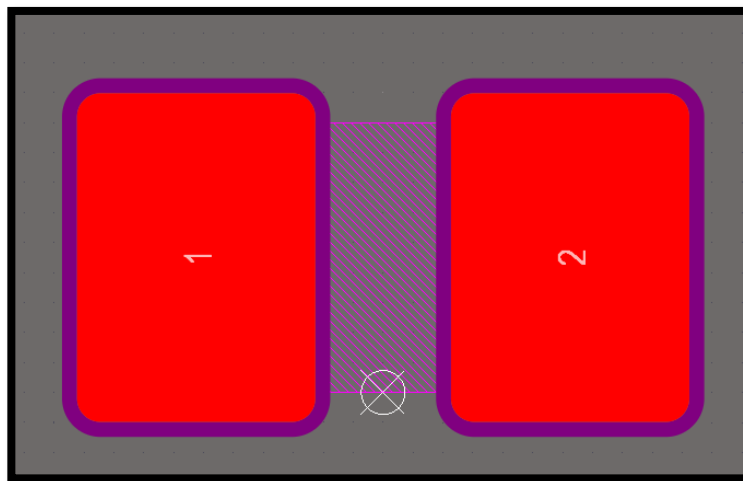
The PCB Footprint for all the Capacitors in the Library (0603 Package)
